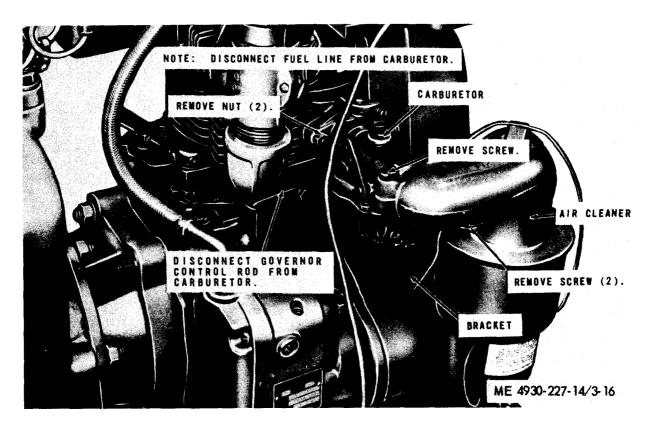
Air cleaner, bracket and carburetor, removal and installation.
